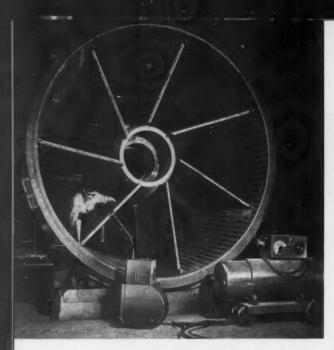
Fabricating a large water-pump diffuser consisting of both rolled-steel plate and cast-steel components. Assembly is mounted on positioning rolls.
